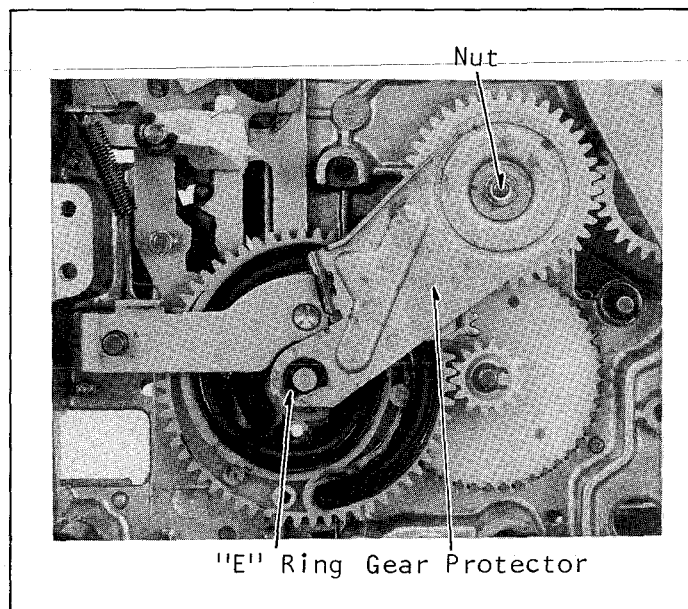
Adjustment of Cam Gear and Mode Select Switch - (6)
